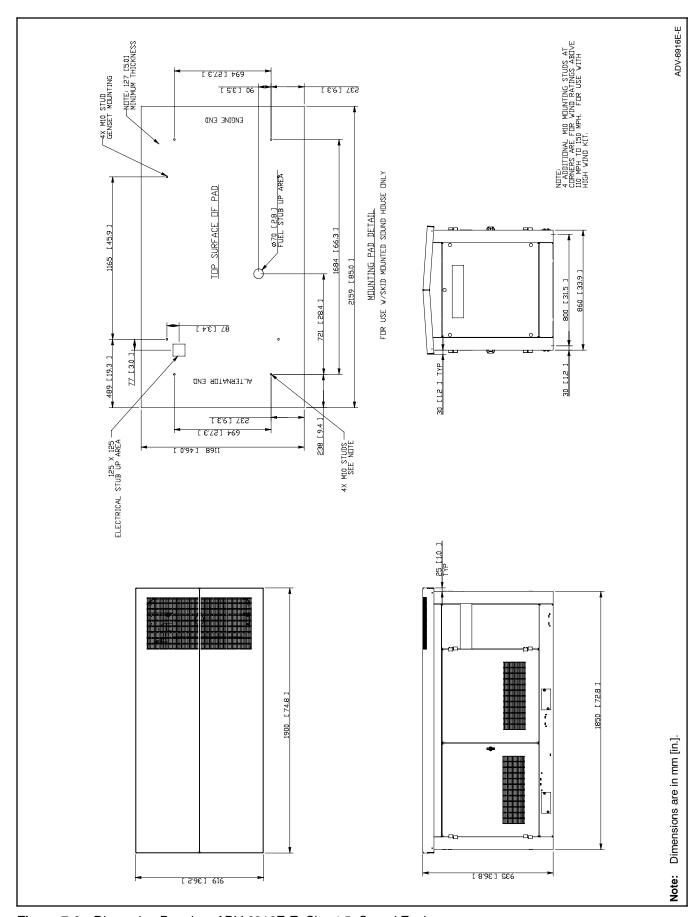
Dimension Drawing, ADV-6916E-E, Sheet 5, Sound Enclosure
